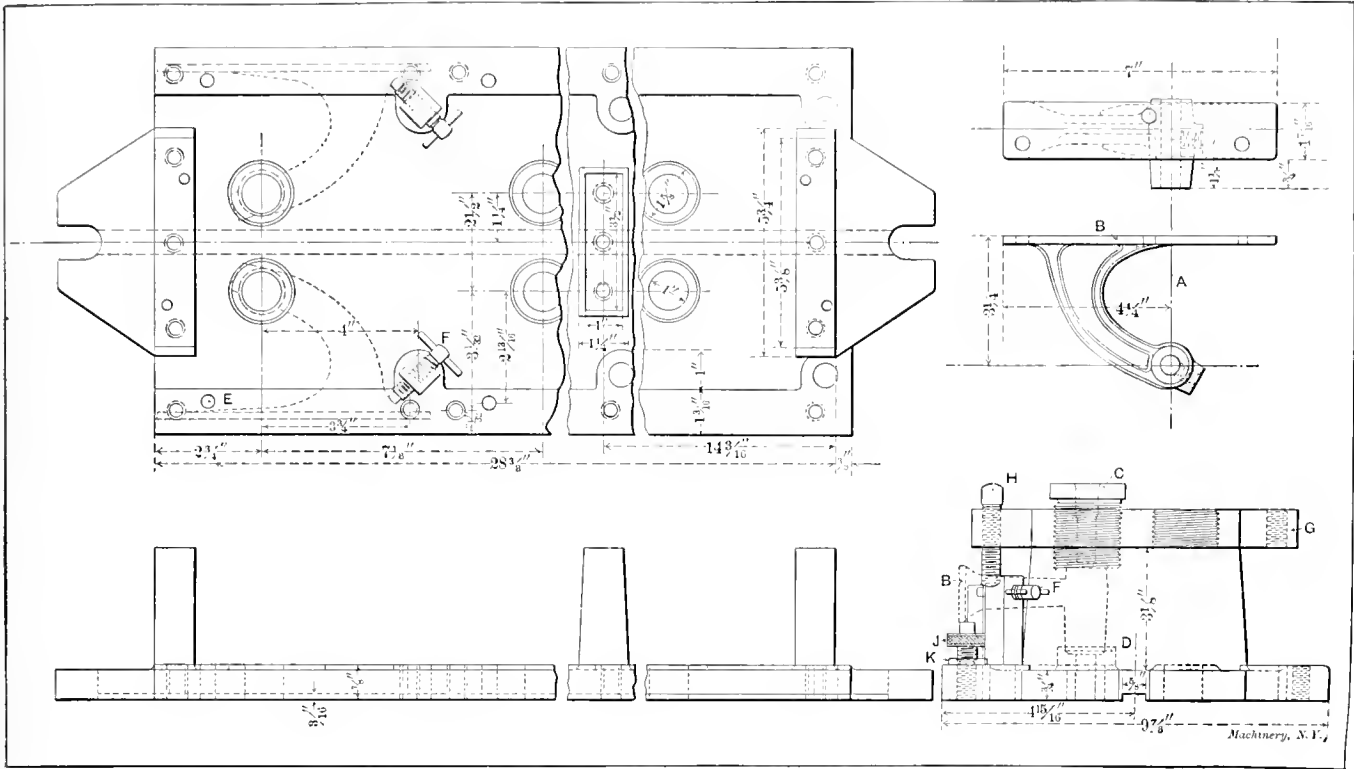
Combination Milling and Drilling Fixture for Spring-hangers
